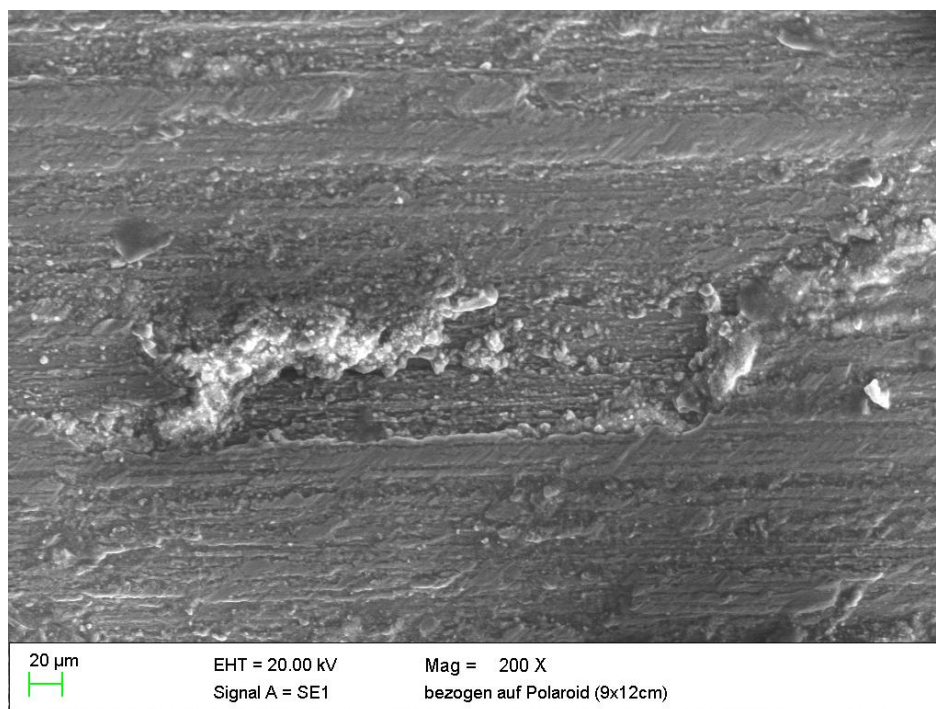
SEM image of the broken specimen: fracture origination point. Fracture surface partly coated with corrosion products.
